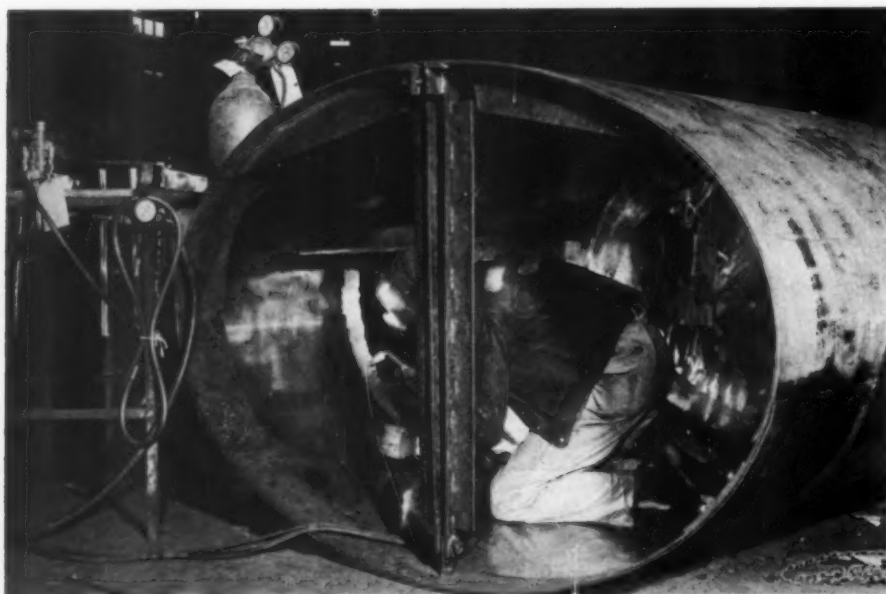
Inert-gas tungsten-arc welding of Type 304 stainless-steel milk tank
